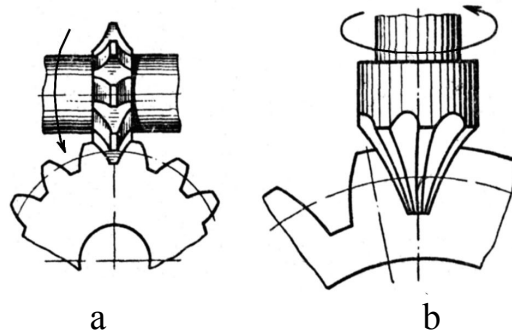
Gear cutting: (a) by an involute cutter; (b) by an involute endmill
